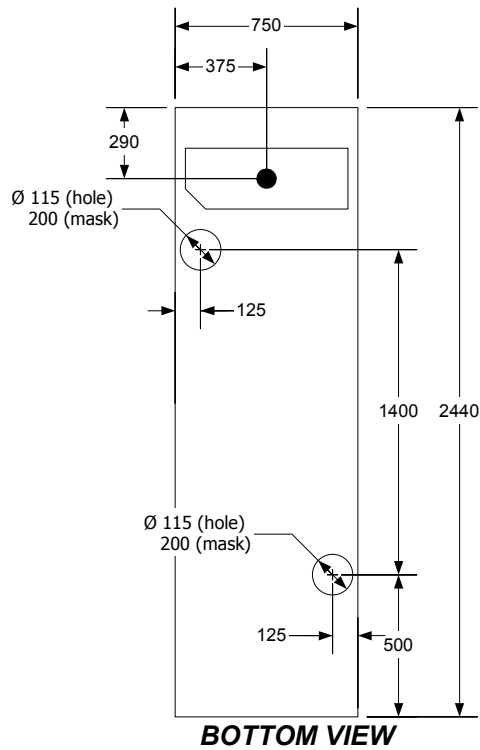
MDK-4 Mounting Hole, Size, and Hirose Connector location (units in mils)
